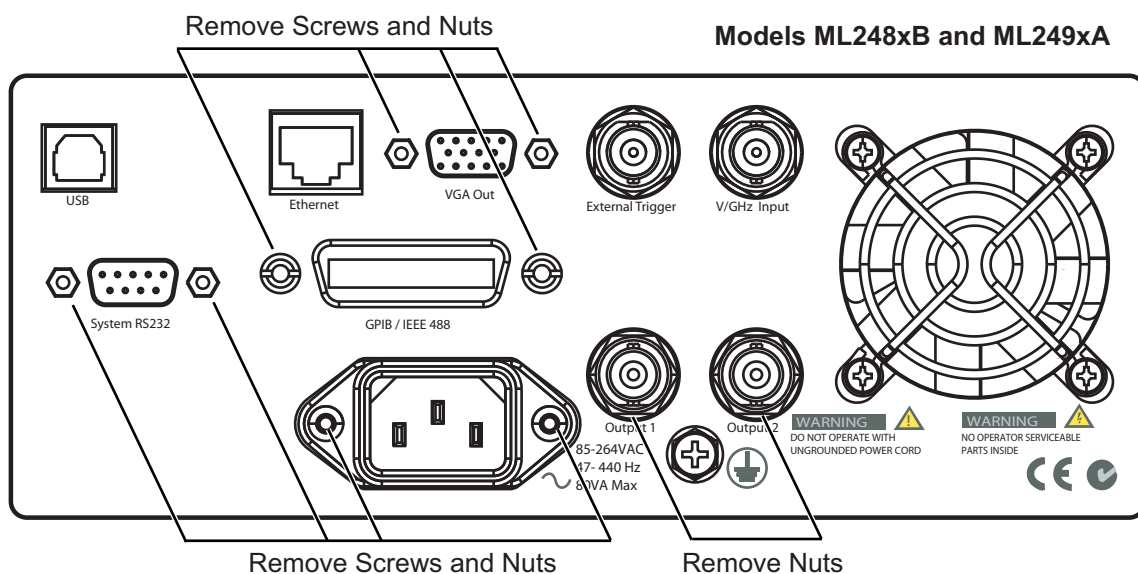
Rear Panel Removal (ML248xB and ML249xA)
